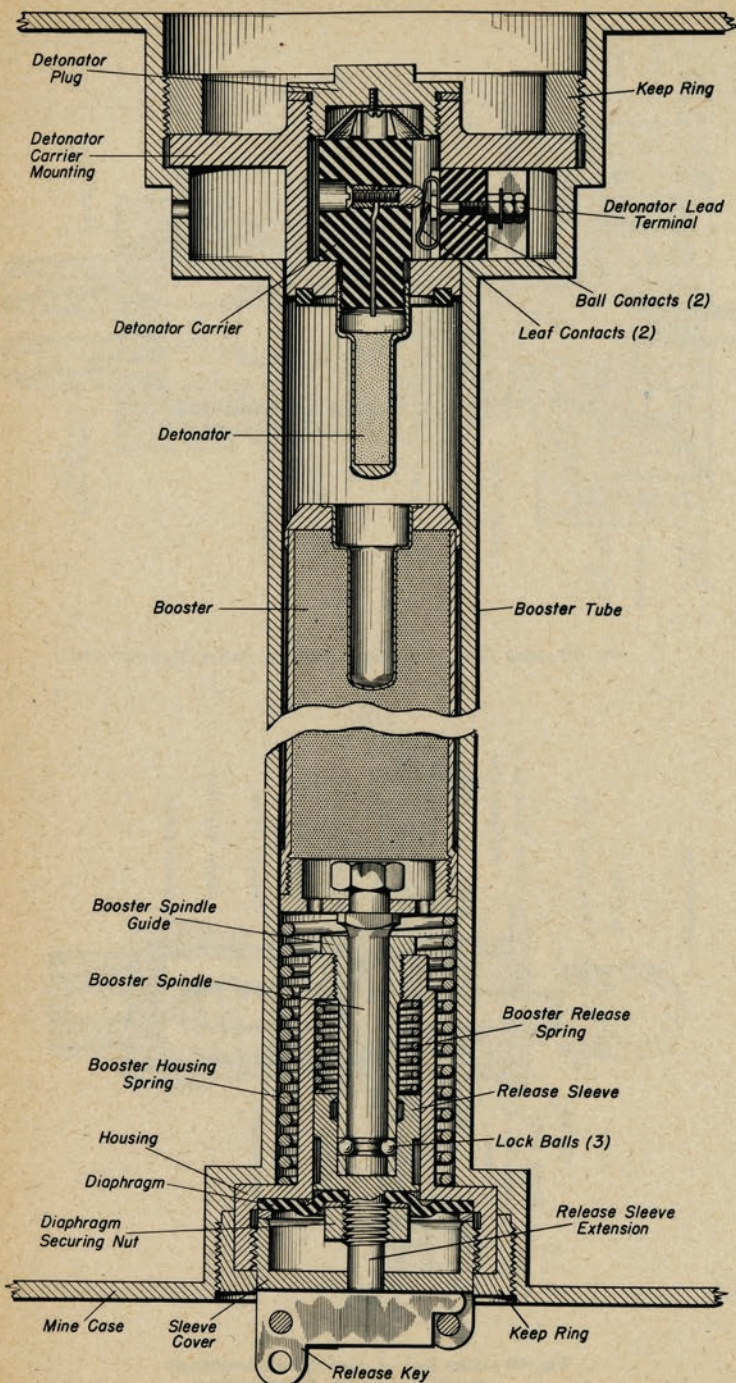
Mine Type JI, Booster and Detonator Assembly, Sectional View
